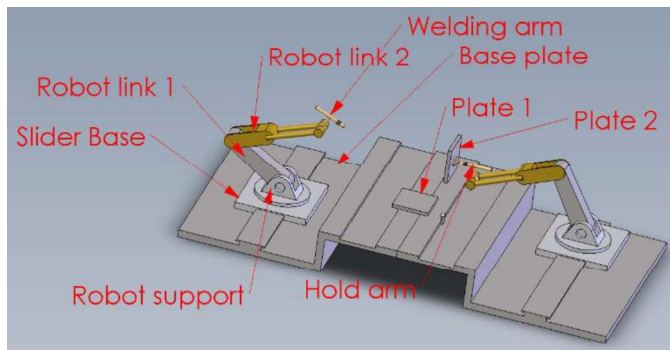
Annotated view of the two-robots welding system; the left robot has a welding arm with a torch while the right one holds up the plated to be welded
